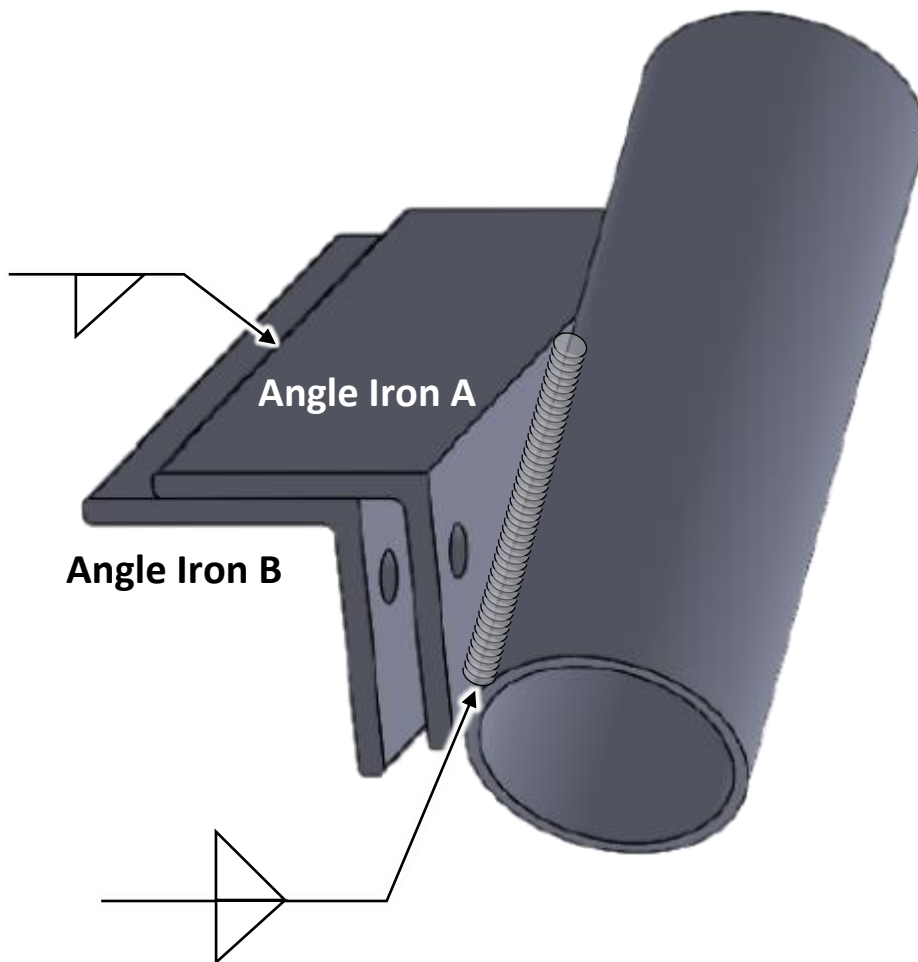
Illustration of welding pipe to angle irons. Weld on both sides.
